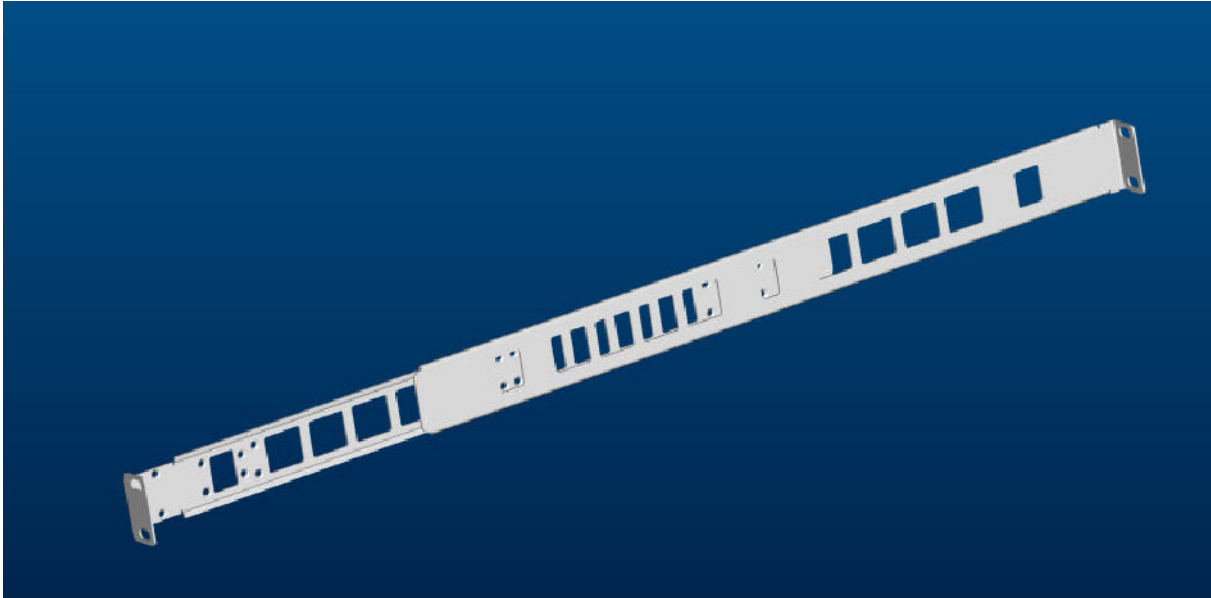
Separate Assembled Brackets before Mounting onto Switch
